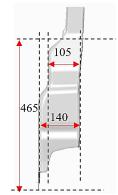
Spatial constrain drawing of the mounting points for concept K100, seen from the side view, describing possible depth.
